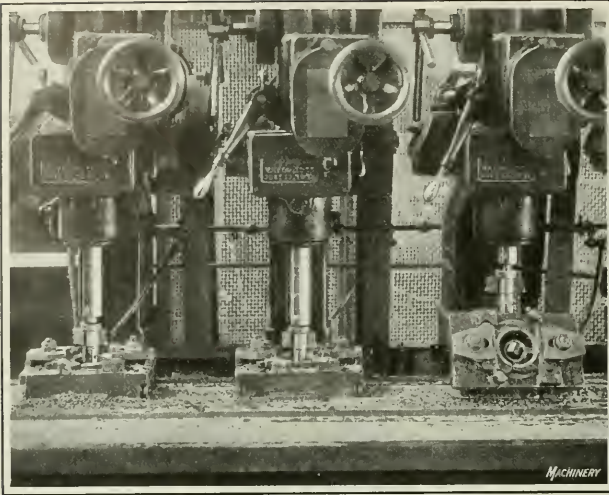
Three-spindle Drilling Machine with Auxiliary Table and Tracks for sliding the Jigs from One Spindle to Another
